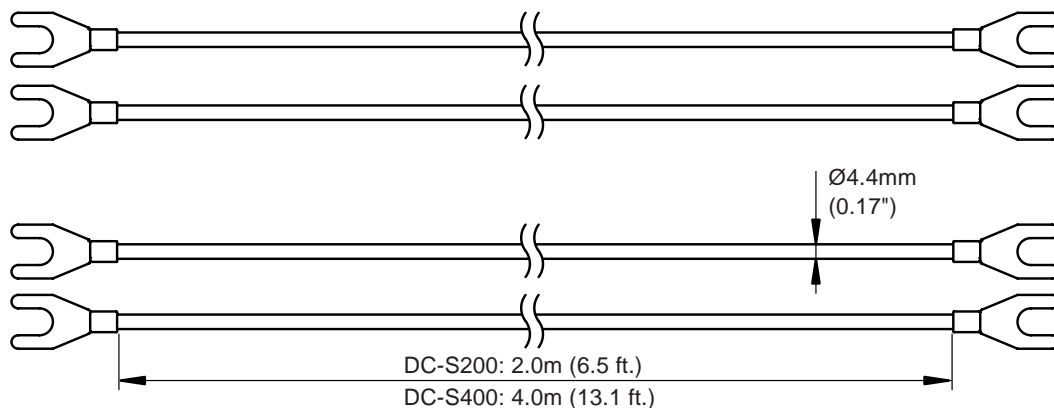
Outline drawing and dimensions for DC-S200 / DC-S400 speaker cables.
